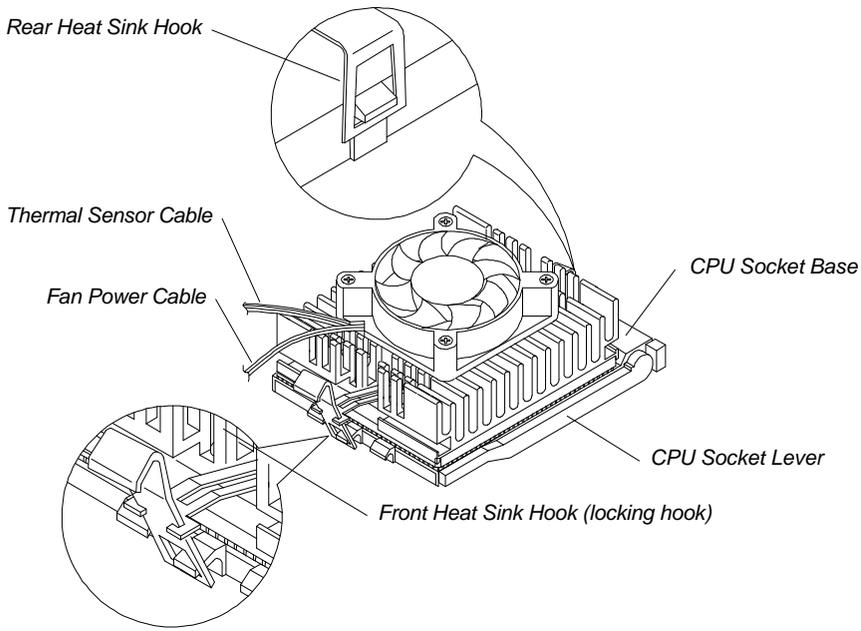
Installing the Hook-Type Heat Sink and Fan
